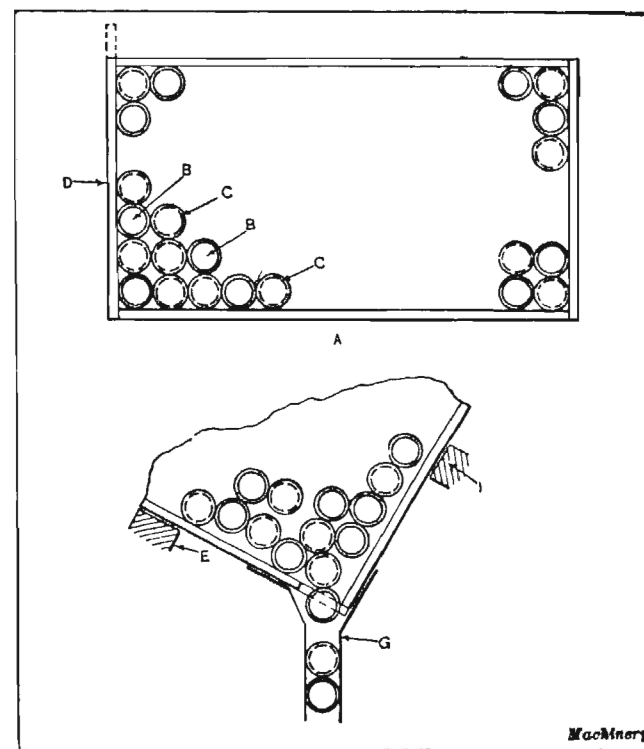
Inclined Tray Method of Feeding Pieces Into a Chute
